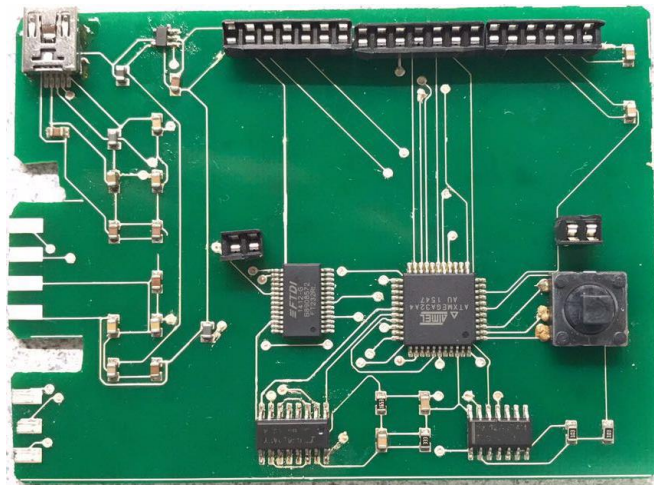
The final 3D-PCB potentiostat with SMD components and DIP sockets
